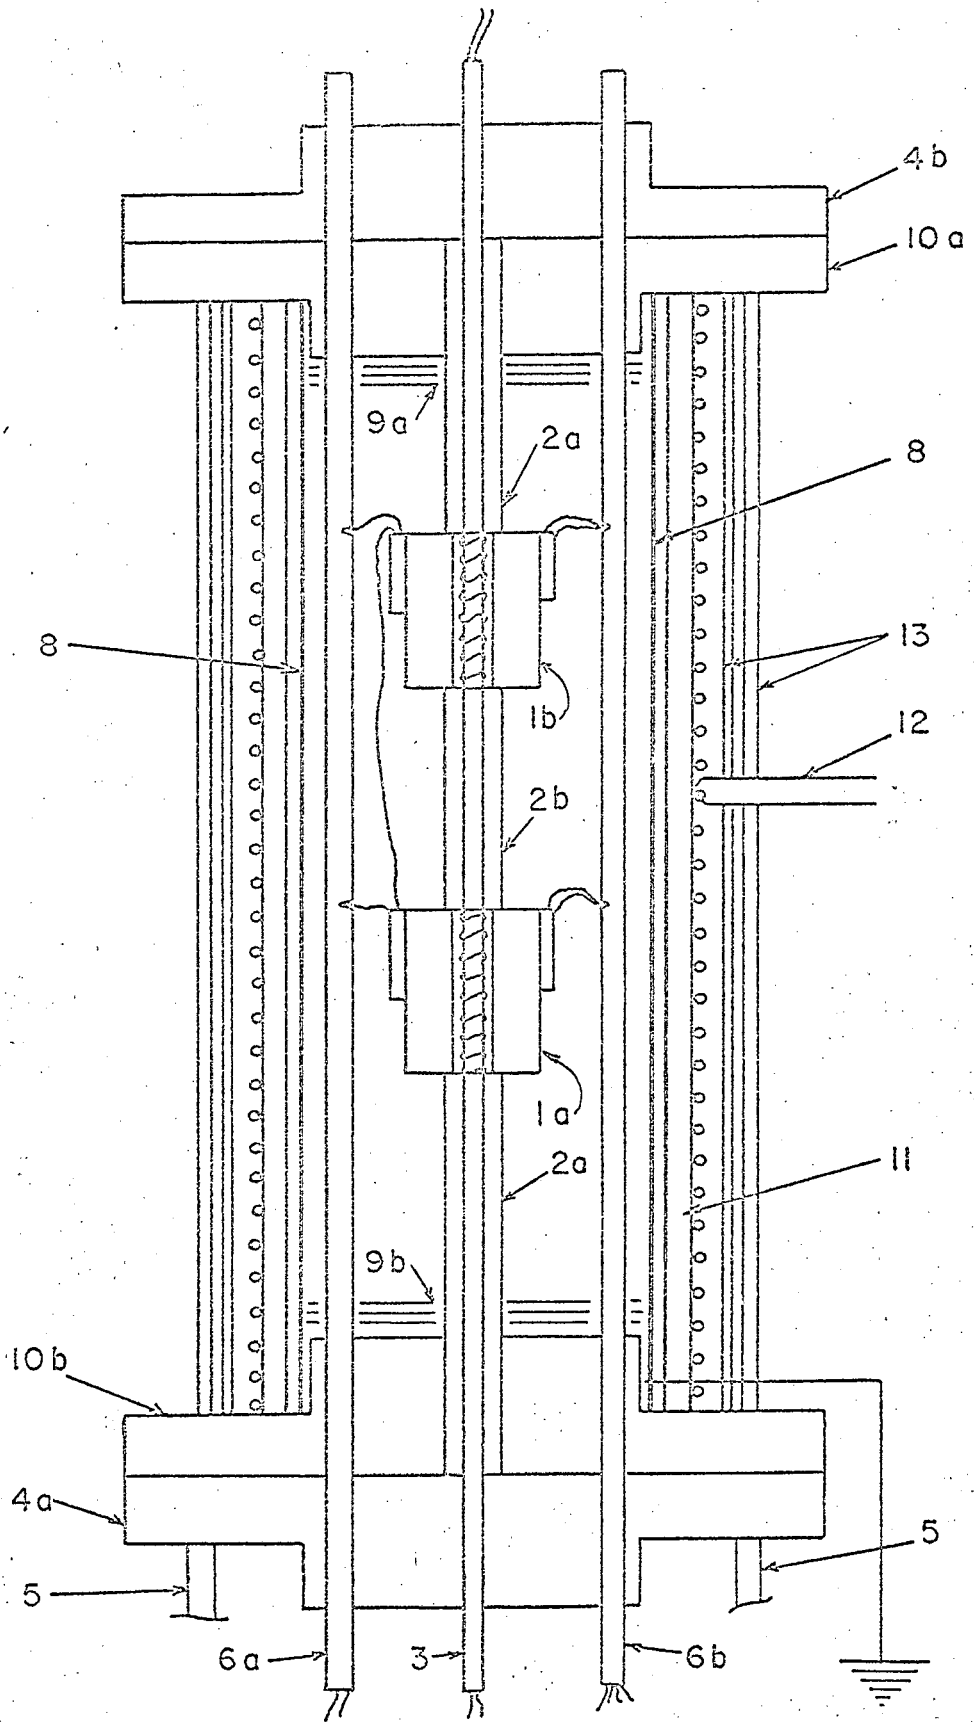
FURNACE ASSEMBLY OF BARNER.
